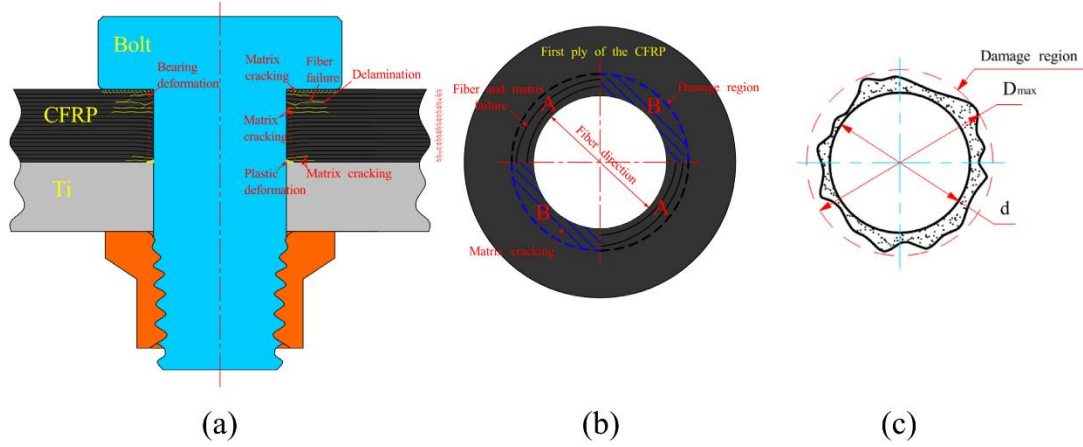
(a) Single-lap composite bolted joint, (b) bearing surface damage, (c) bearing damage region (Zuo et al., 2020)
